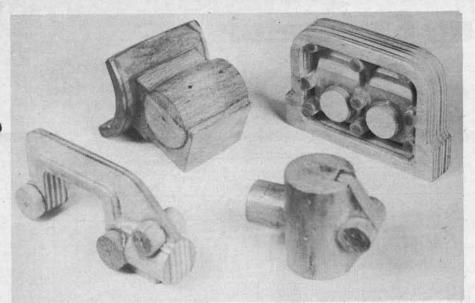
Various patterns built up from several pieces; a traction engine cylinder, water-cooled twin cylinder petrol engine head, and two component for a camera accessory .
